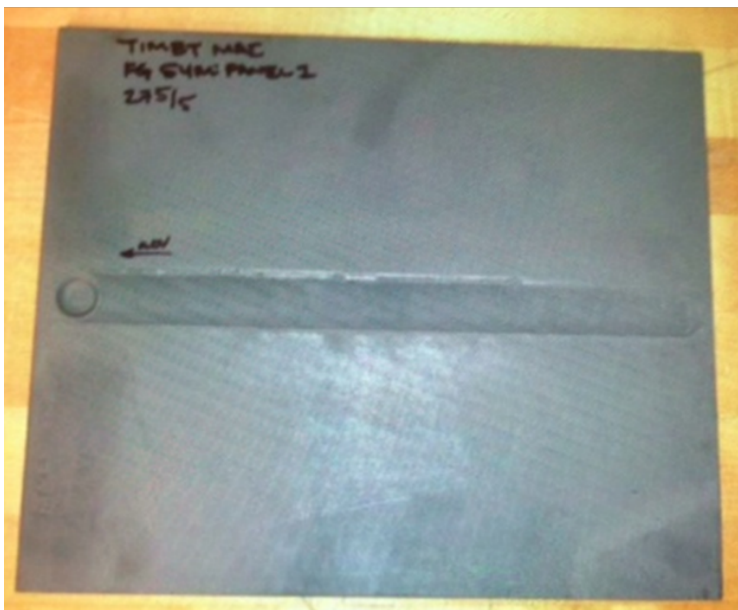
Typical Friction Stir Welded plate
